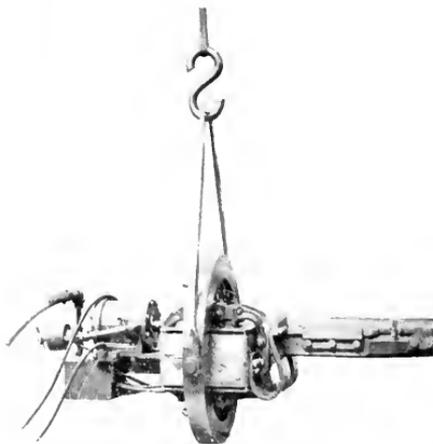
Welding Machine for Splicing and Welding Iron Mesh Re-enforcing for Concrete Ships
